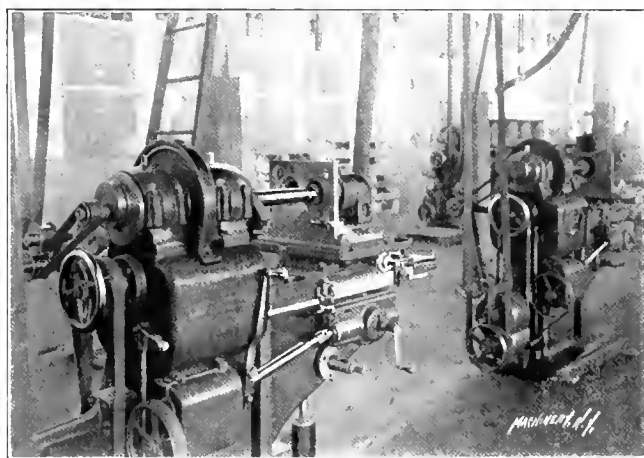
Heald's Internal Cylinder Grinder under Inspection Test.
